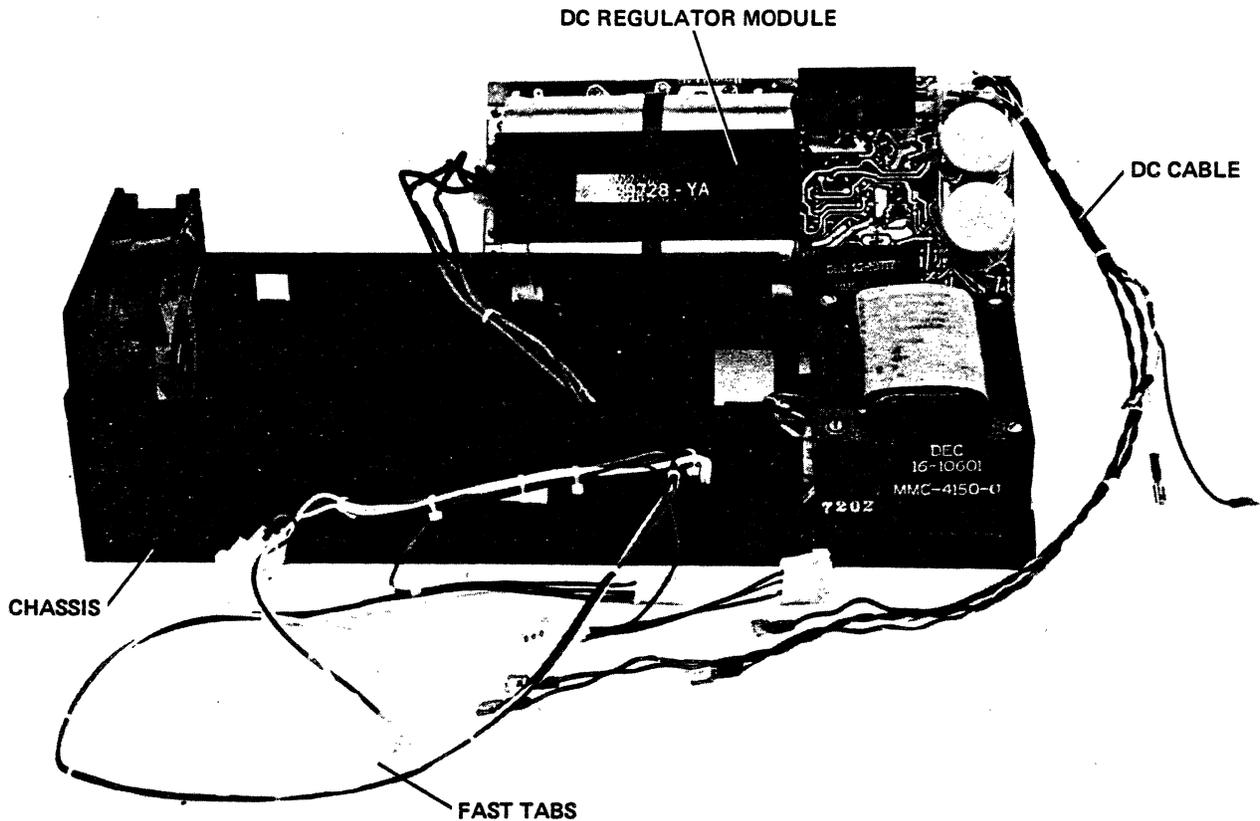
Power Supply Assembly With DC Regulator Module Removed
